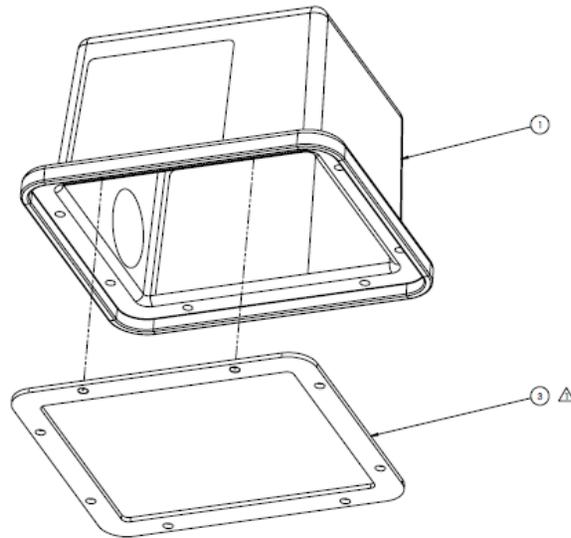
Main Assembly with HP Manifold, A90388 Sheet 6
